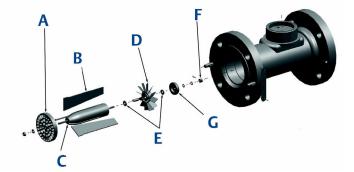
Internal Assembly for a Nominal Pipe Size DN80 to DN100 (3-in to 4-in) Liquid Turbine Meter
